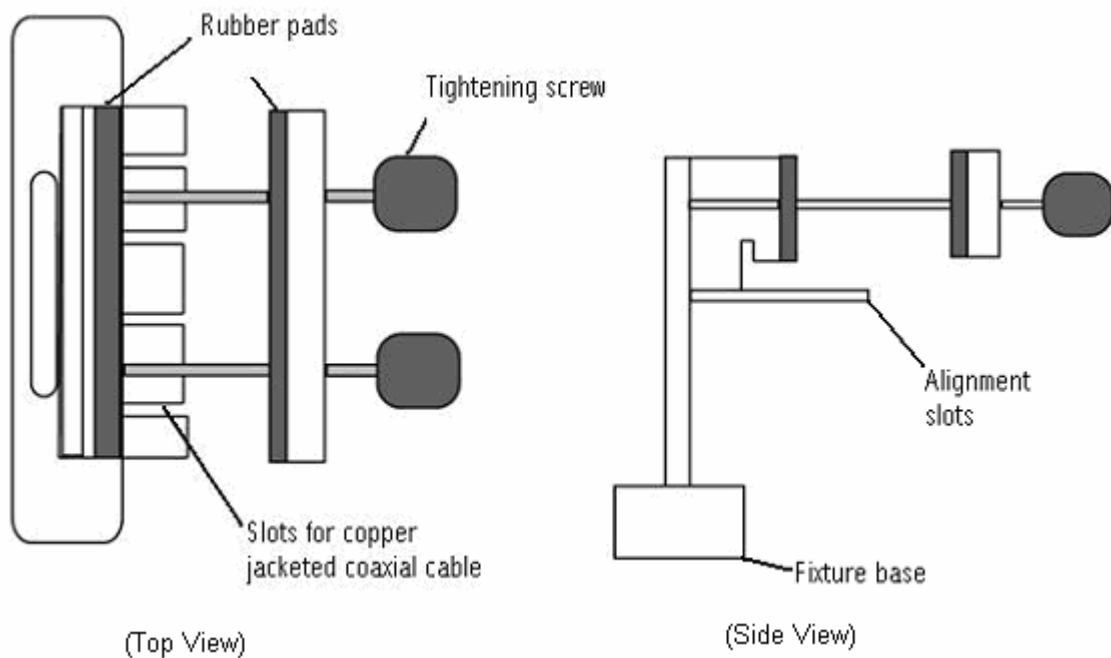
Fixture for Copper Jacketed Coaxial Cable and Hemispheres
